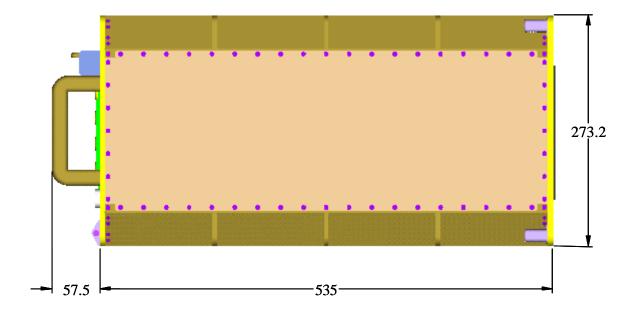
Side View of ACOP with the Front Panel Closed (dimensions)
